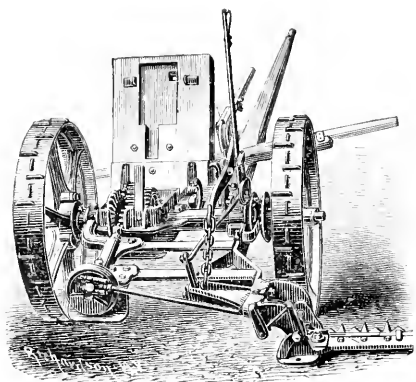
Wheeler Mower No. 6, with Cover Raised to Show Gearing.
